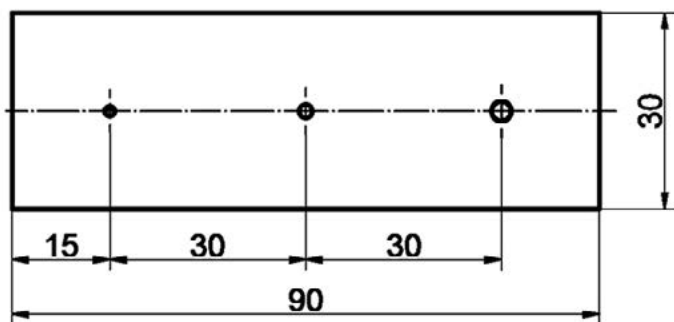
Shape and dimensions of 4 mm thick X5CrNi18-10 high-alloy steel plates for dye-penetrant tests
